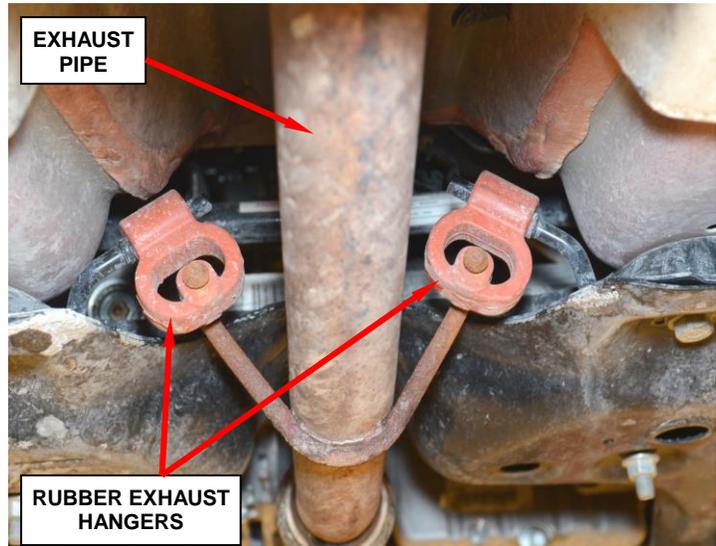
Rubber Exhaust Hangers (front hanger shown)
